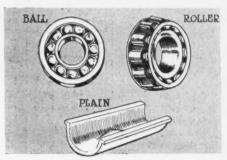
BALL, ROLLER AND PLAIN BEARINGS
